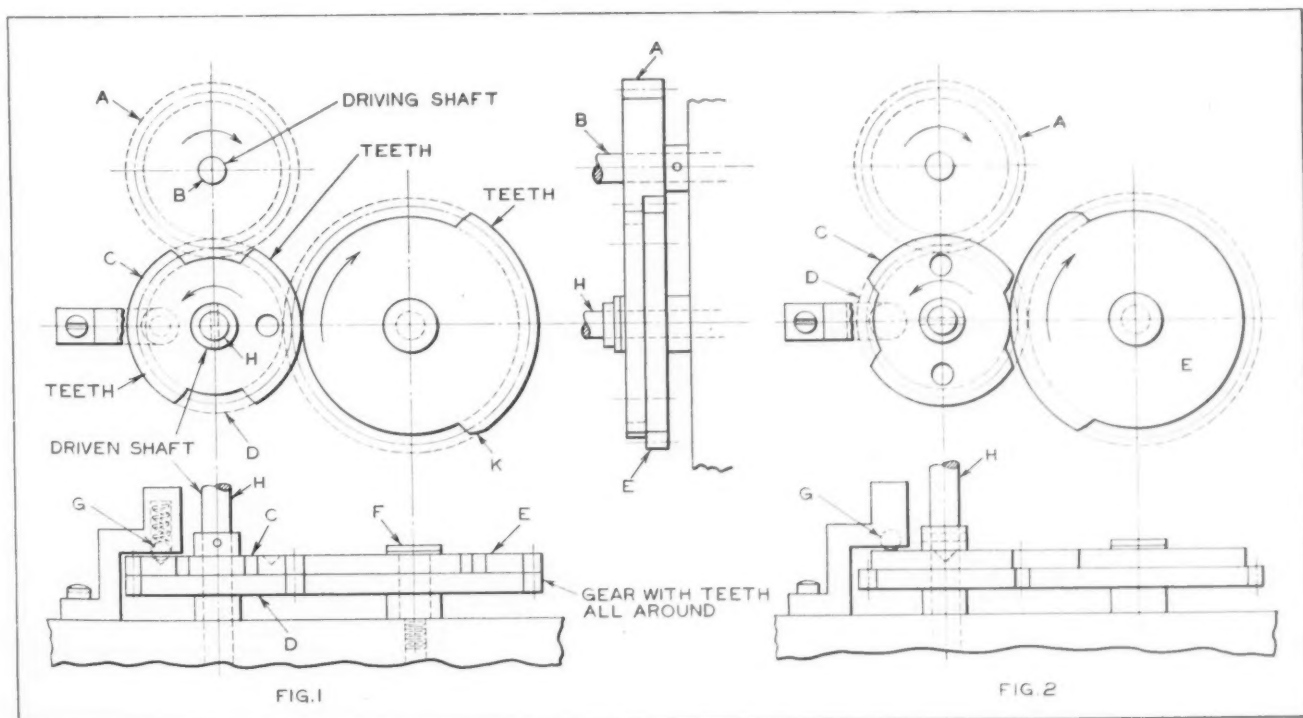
Mechanism by Means of which Shaft B Transmits a Half Revolution to Shaft H, Followed by a Rest Period Equal to One Revolution of Shaft B. Fig. 2. Same Mechanism with Shaft B Driving Shaft H while Gear E Remains Idle
